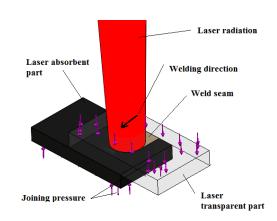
Basic representation of the laser transmission welding method [7].
